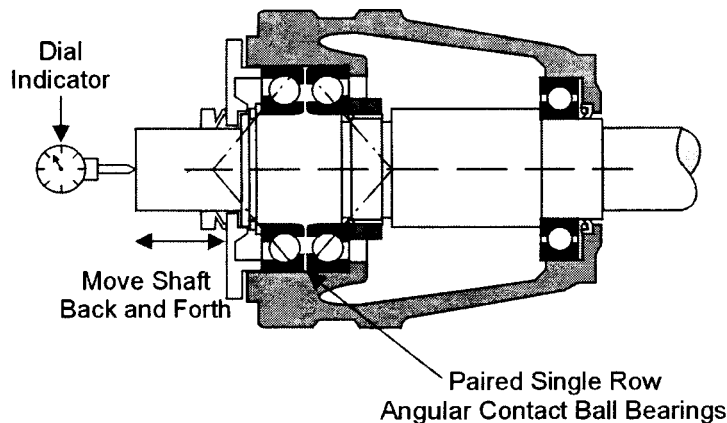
Checking the clearance on a pair of single row angular contact ball bearings. (Courtesy SKF Canada Limited)
